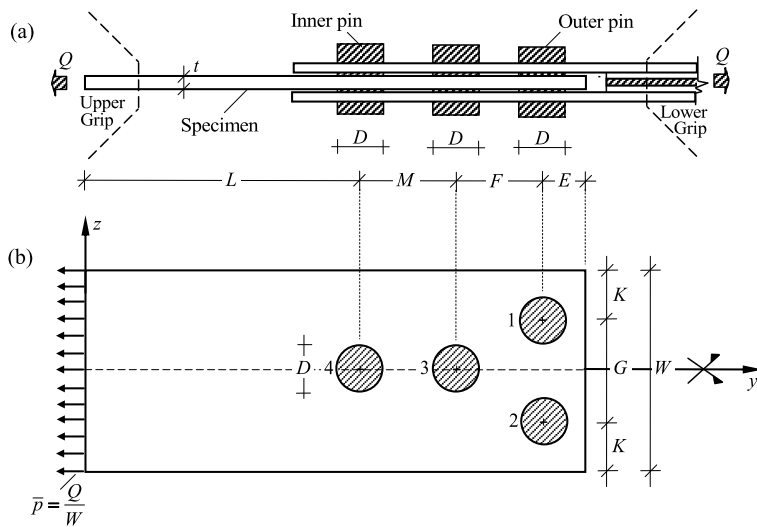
Schematic representation of the multi-pin joints composite plate: (a) fixture test for load bearing capacity evaluation; (b) mechanical model
